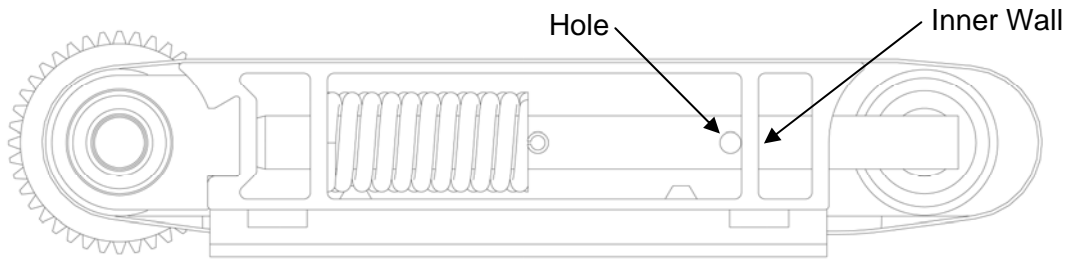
SIDE VIEW OF THE BELT TRAY TENSIONING MECHANISM
